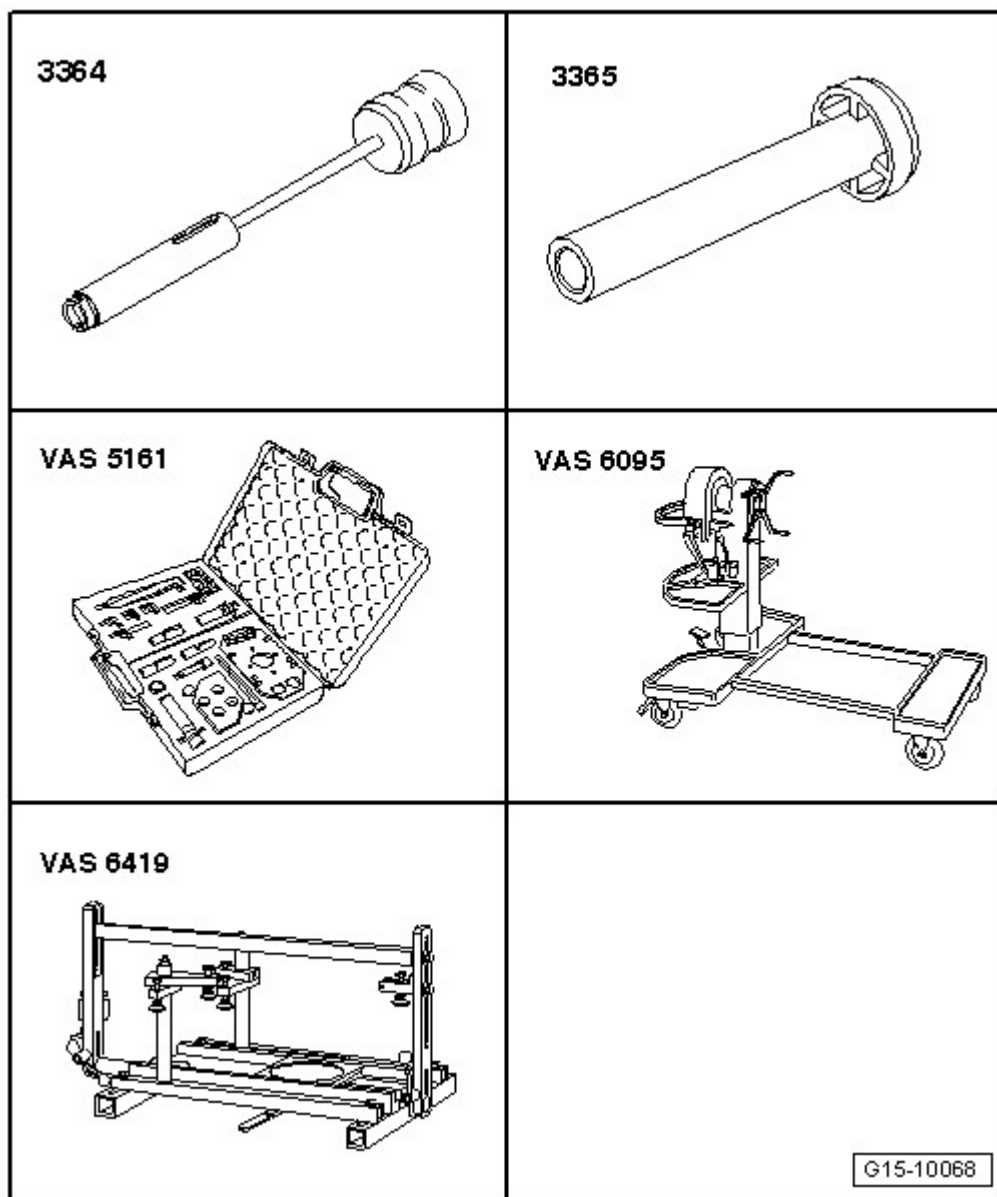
Identifying Special Tools -- Valve Stem Seals With Cylinder Head Removed
